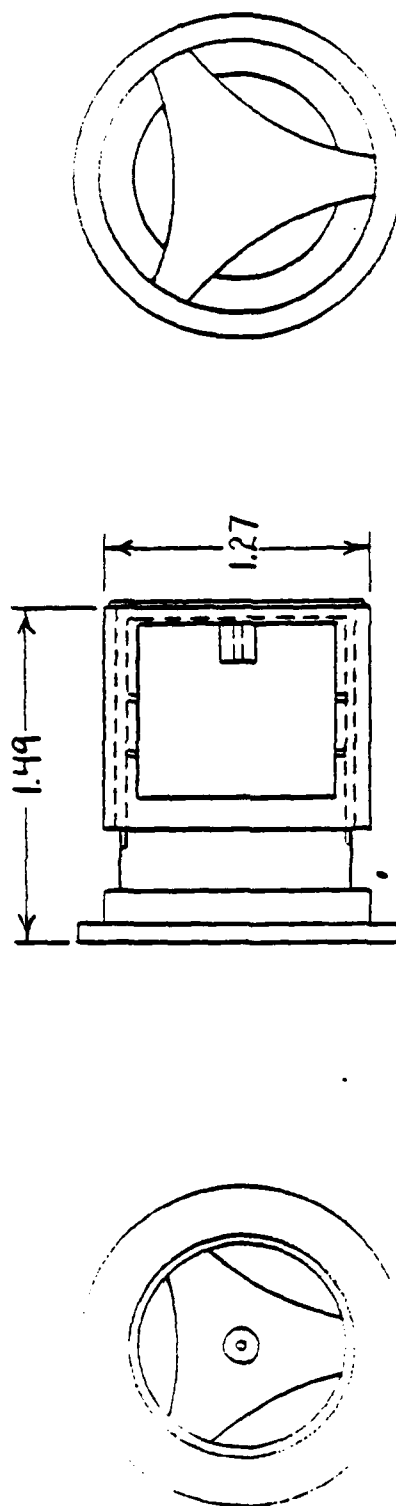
OIL JET CARTRIDGE DETAIL. DRAWING
